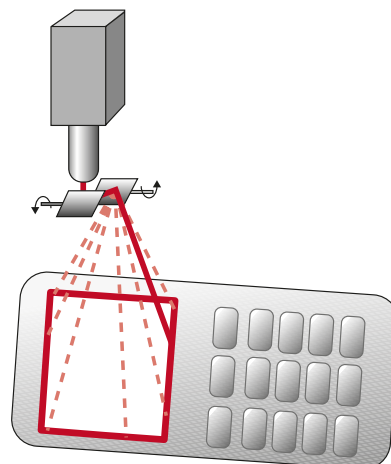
Schematic of quasi-simultaneous welding
